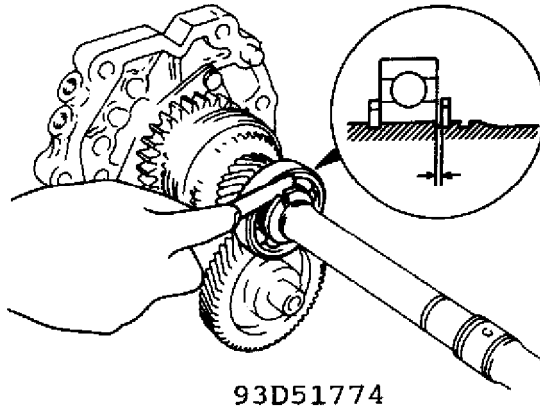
Measuring Clearance Between "C" Washer & Rear Bearing (M-Type)
